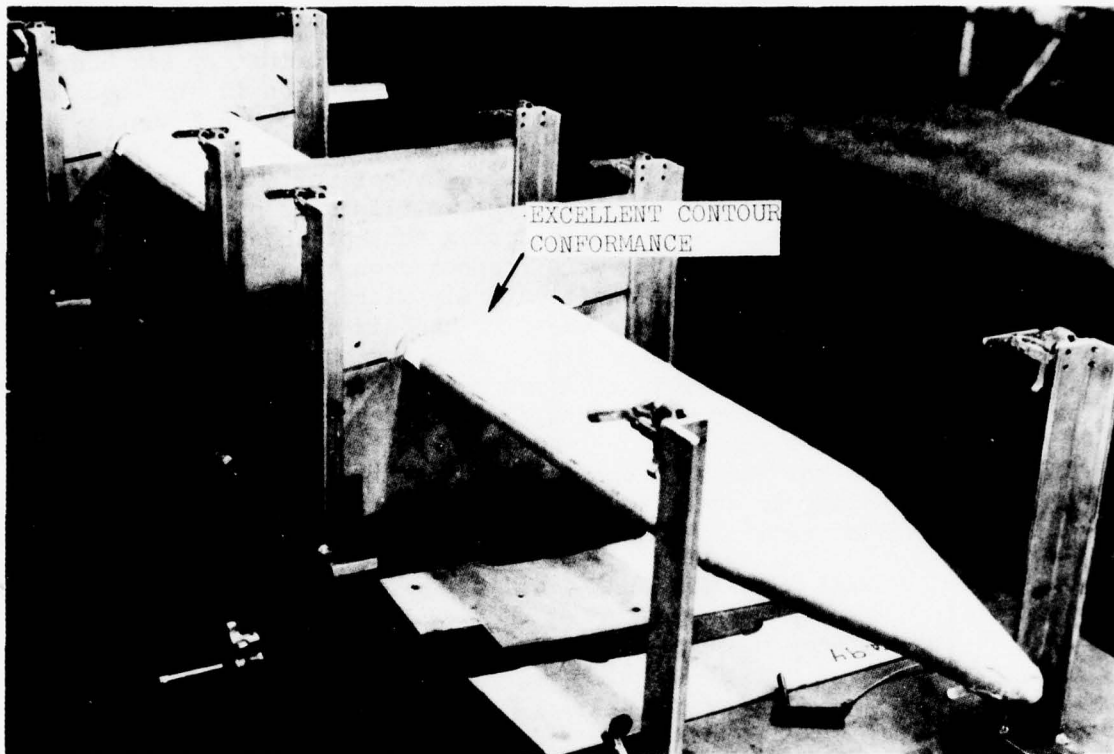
OVERALL VIEW OF CREEP FORMED SPAR ON CONTOUR INSPECTION FIXTURE.
